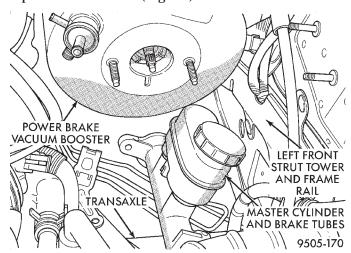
Master Cylinder Assembly Positioned For Booster Removal
